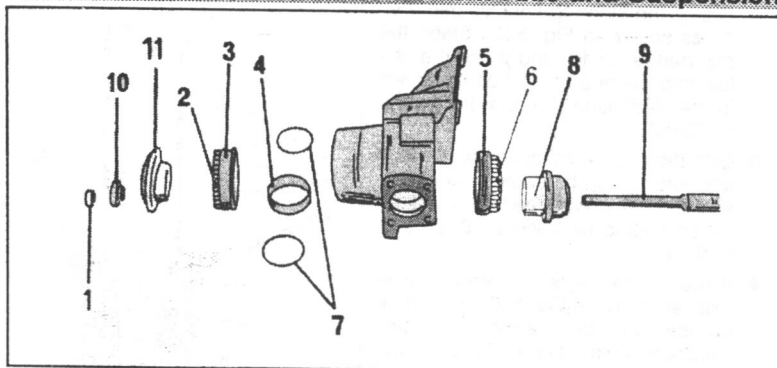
Details for the assembly of the steering knuckle and the wheel bearings, using the special tools.
